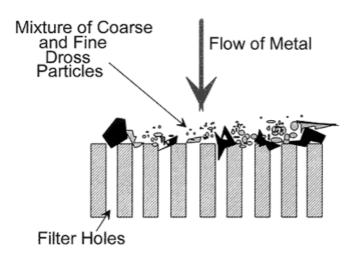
The view of metal casting process and inclusions over ceramic filter [4].
